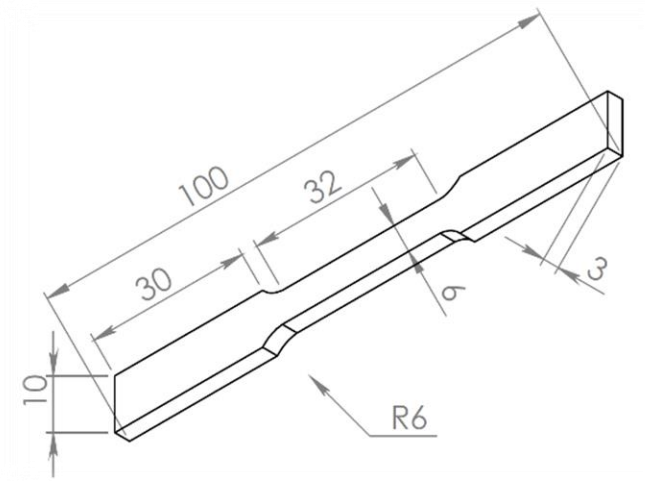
Uniaxial tensile testing geometry (ASTM E8/E08M) (dimensions are in mm).
